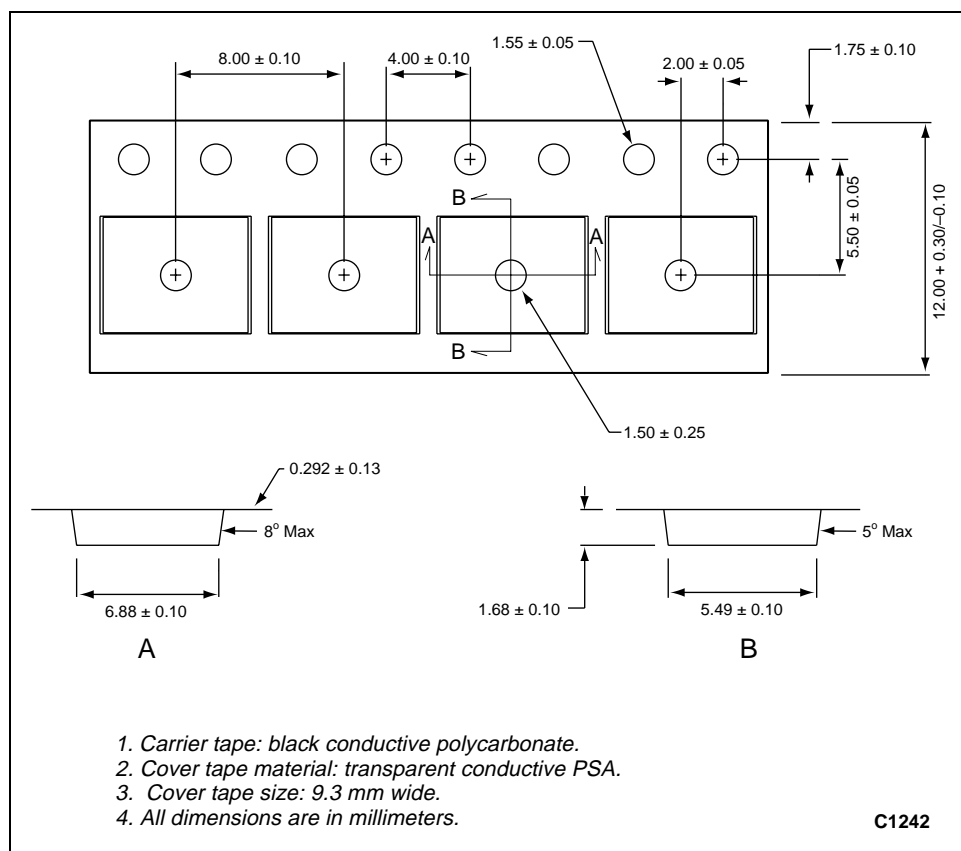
CX65002 8-Pin SOIC Tape and Reel Dimensions
